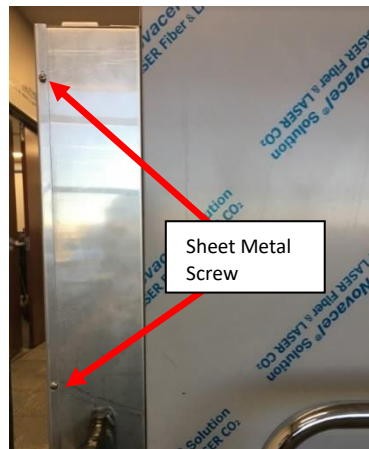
Rear Enclosure Cover secured in place using Sheet Metal Screw on either side.
